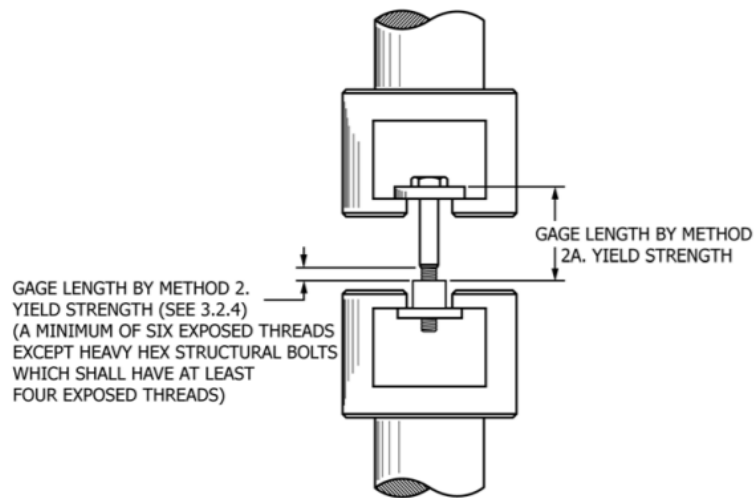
Typical setup for bolt tensile testing (ASTM F606, 2016)
